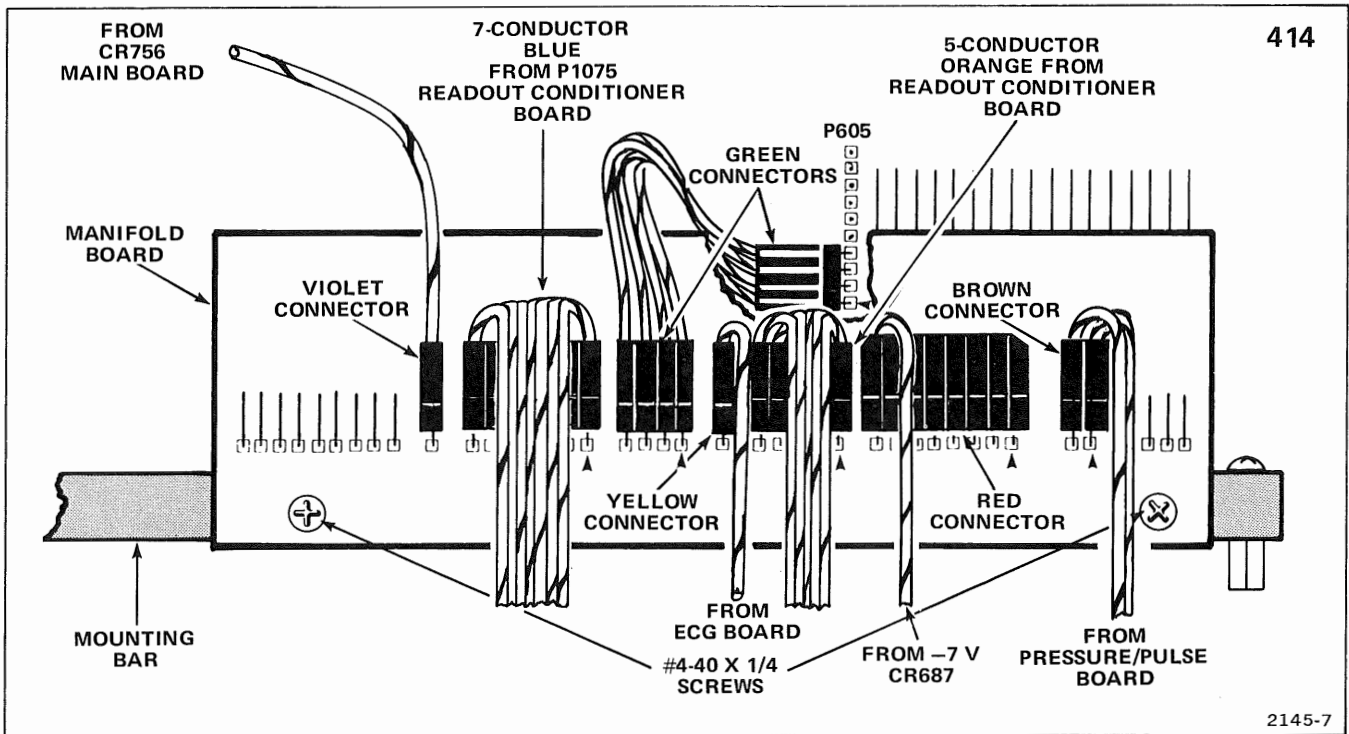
Installing Manifold Board and connecting cables to 414.
